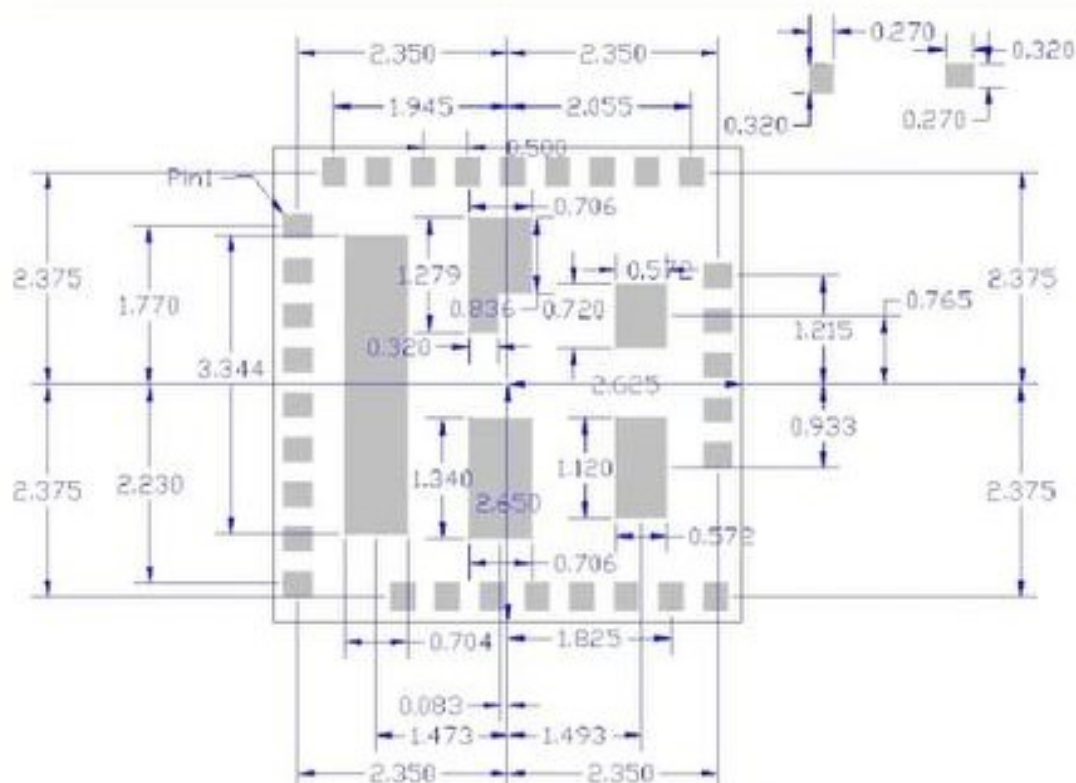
HS8298H PCB Stencil Pattern (Top View)
